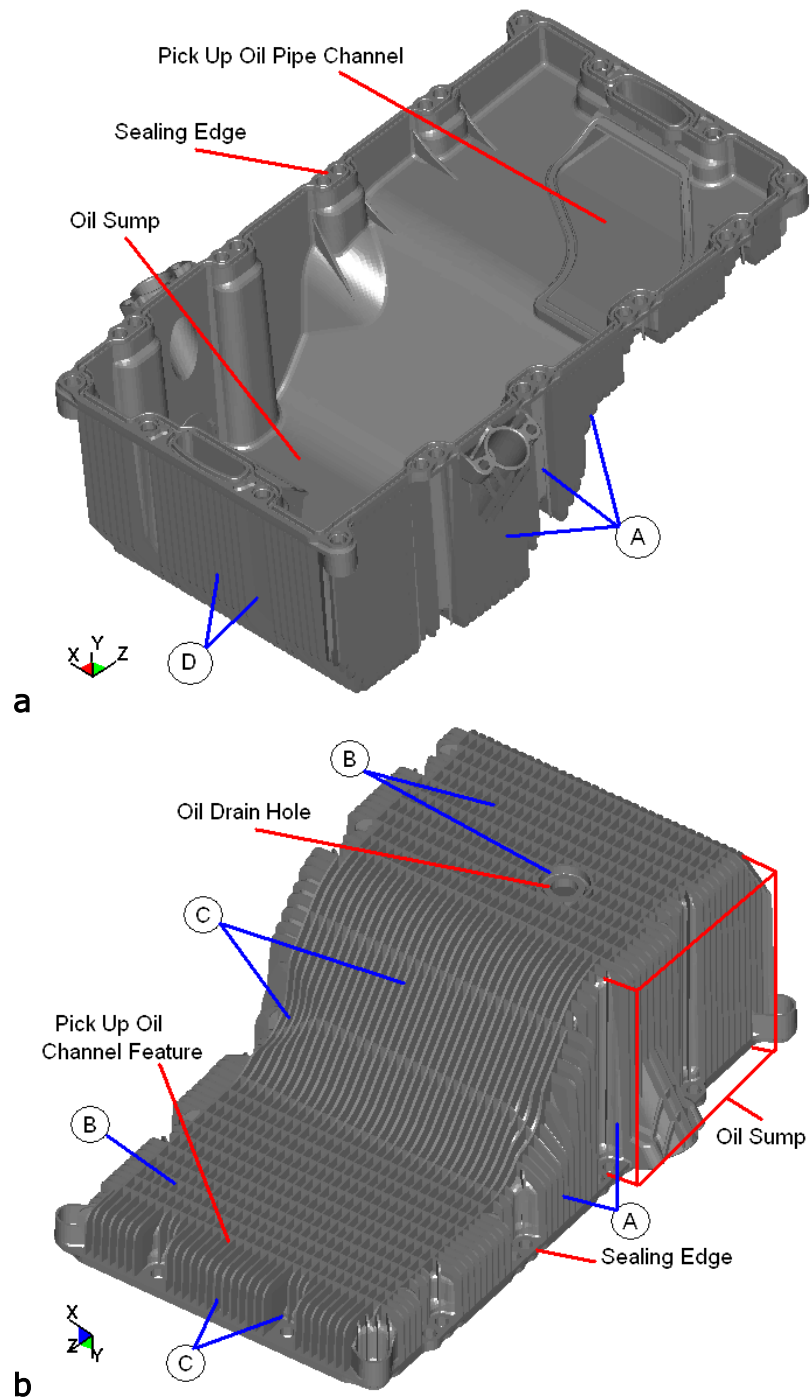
Improved version of the oil pan and key areas, a) inner view, b) outer view
